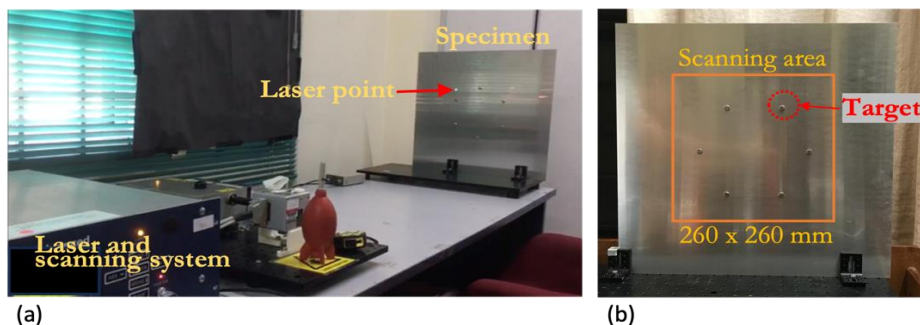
Inspection setup (a) Overview (b) Specimen plate with six sets of fasteners fixed in a polar symmetric arrangement. The target fastener was located at the top-right corner.
